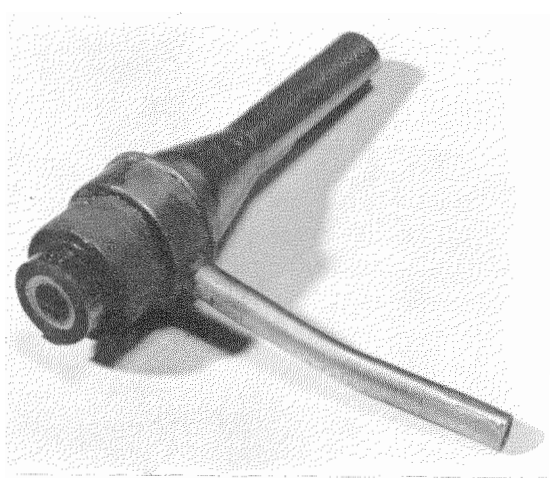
Tool for spark machining spiral inductors on printed-circuit boards.
